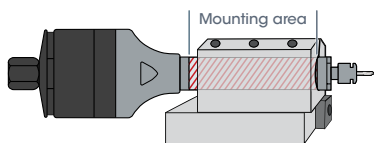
A mounted 202HD showing that the fixture is only clamped within the labeled mounting area.
